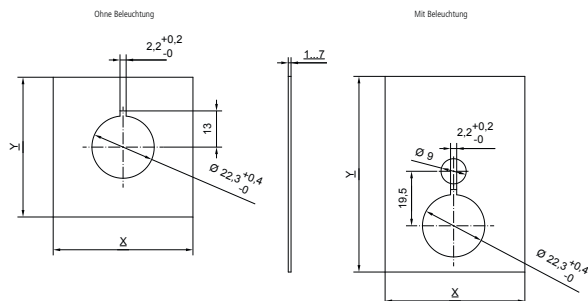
Mounting holes dimensions of the built-in version (mm)
